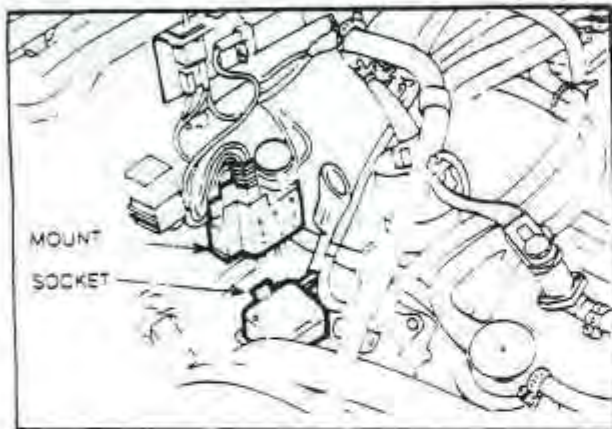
GOVERNOR COMPUTER WIRING SOCKET AND MOUNT
